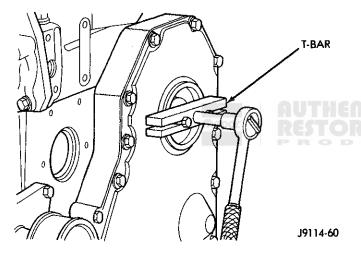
Separating Pump Gear from Injection Pump Shaft
